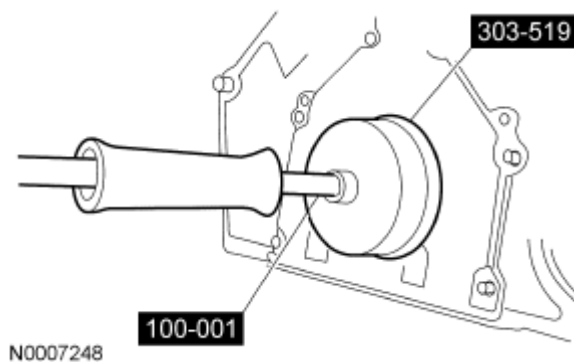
Removing Crankshaft Rear Seal Using Crankshaft Rear Oil Seal Remover And Slide Hammer
